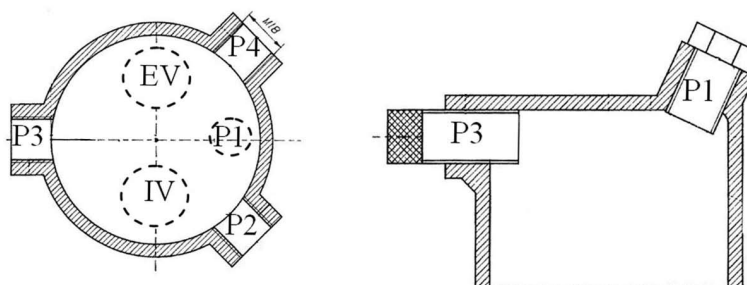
Cross section of the CFR engine, P1: spark plug position, P2-P4: sensor positions, IV: intake valve, EV: exhaust valve.
